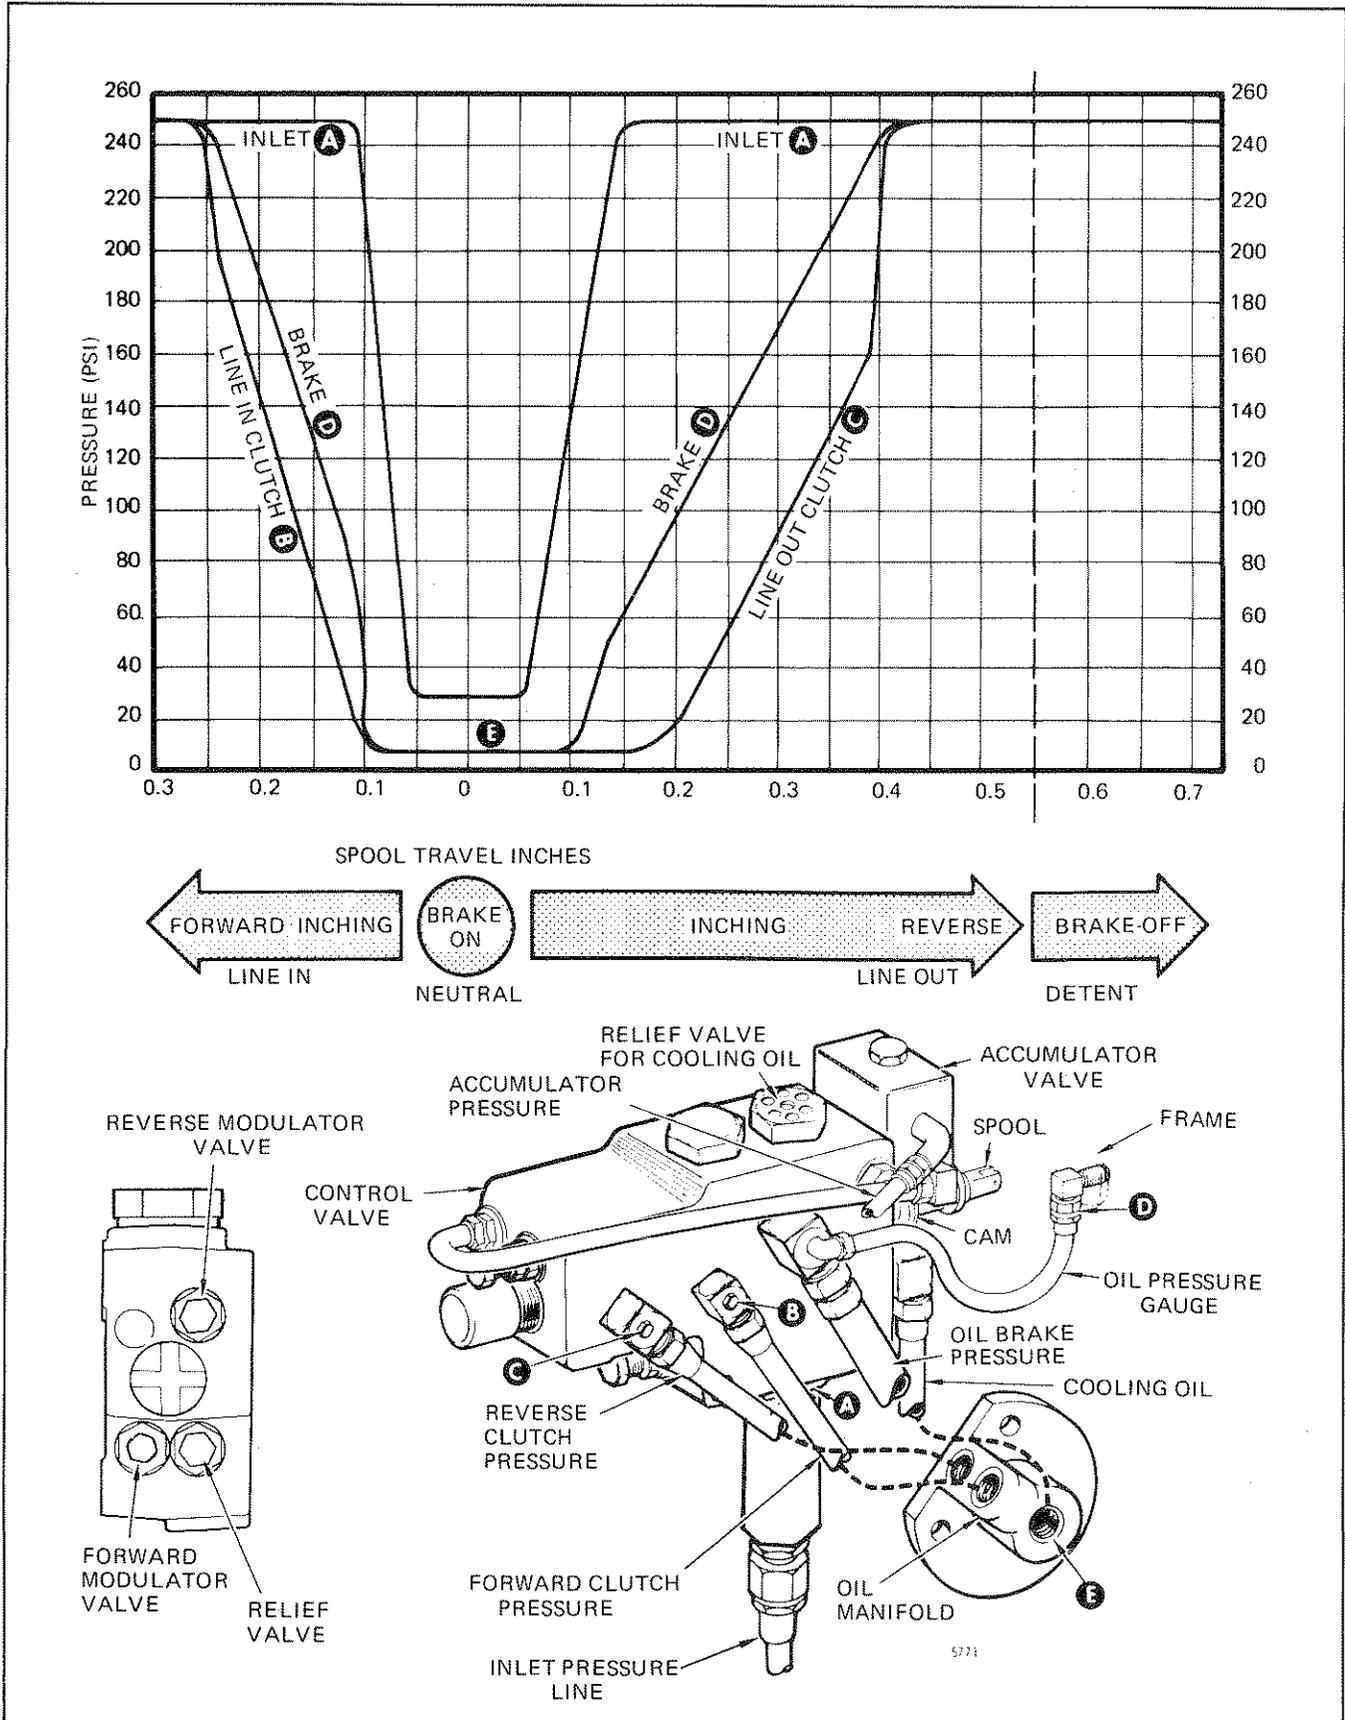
HYDRAULIC PRESSURE CHECK PORTS
